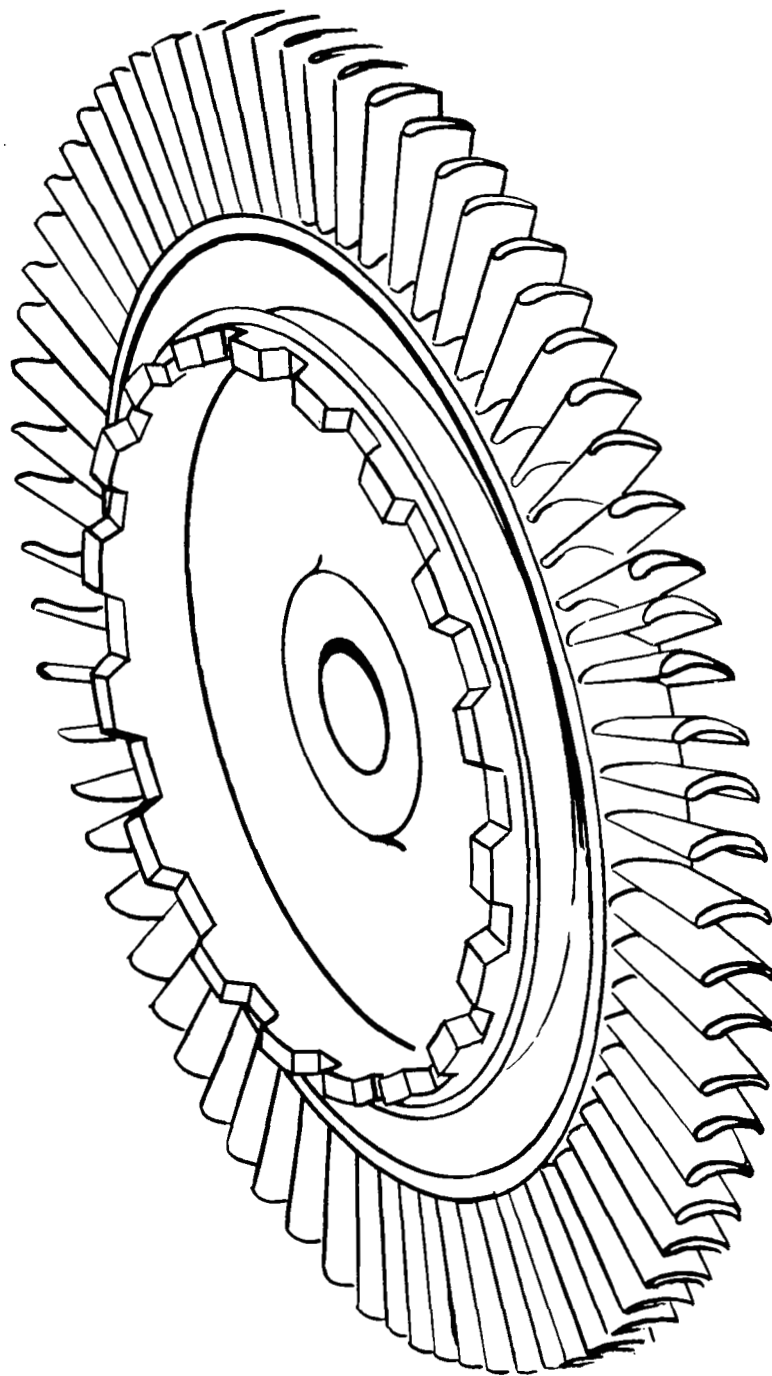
Integrally Machined Turbine Wheel - KDTZM Molybdenum Alloy.
